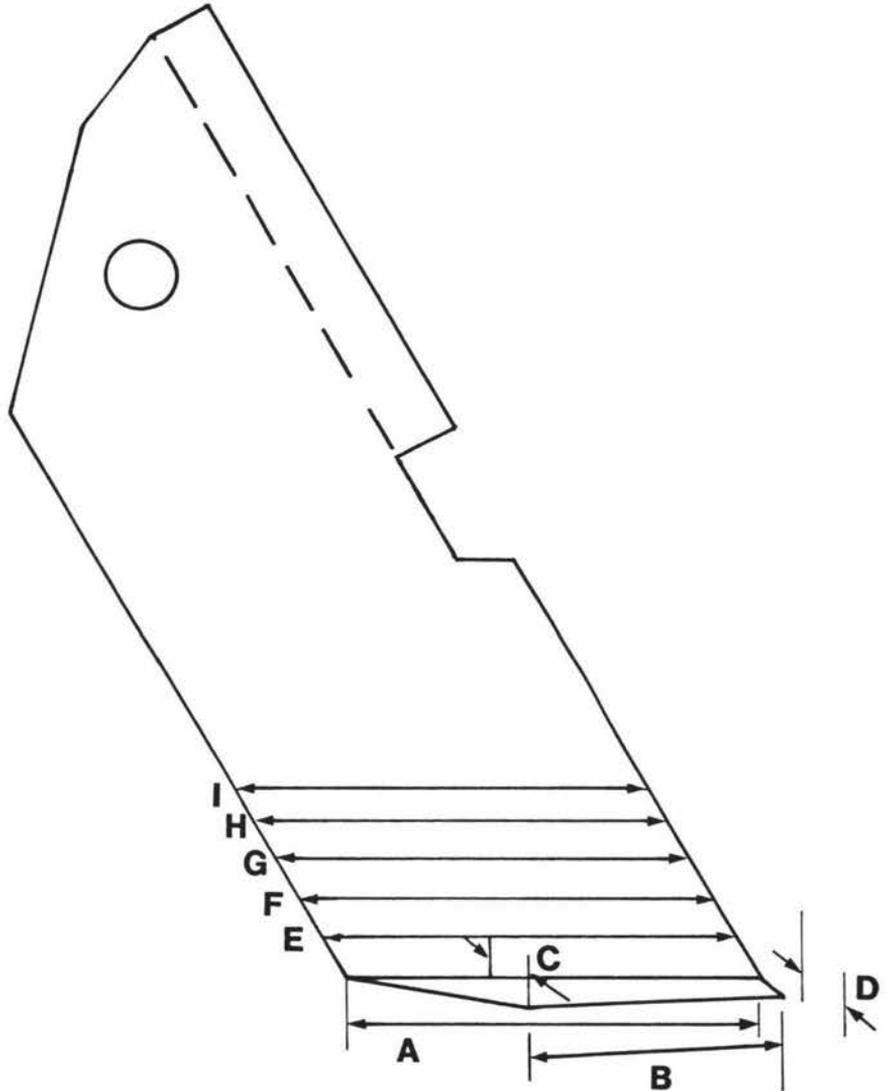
The measurement jig that was used for standardising coulters linear measurements.
